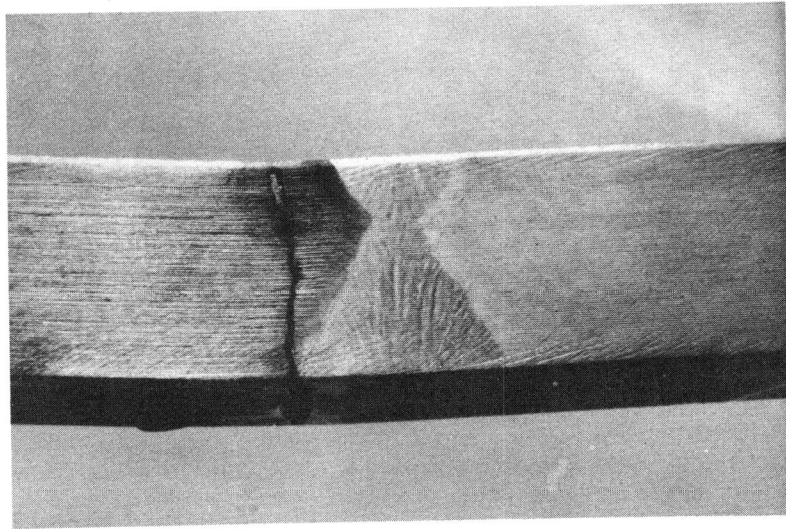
Fracture area along the weakest layer of the HAZ, modified "Pellini"-specimen.
